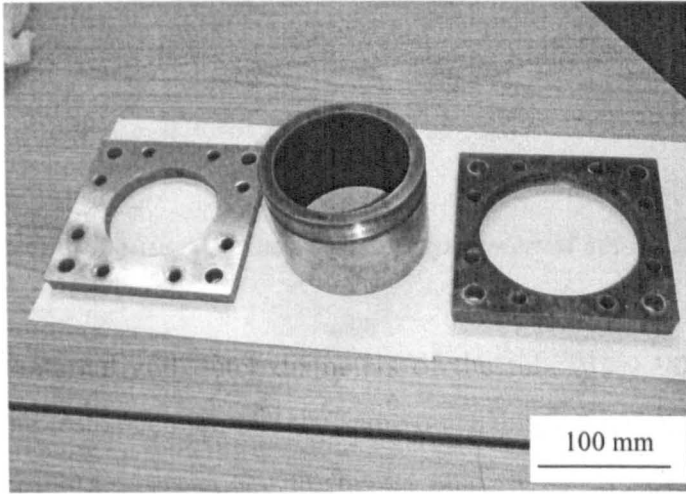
Photograph of the steel tube and clamping rig used in the blast experiments.
